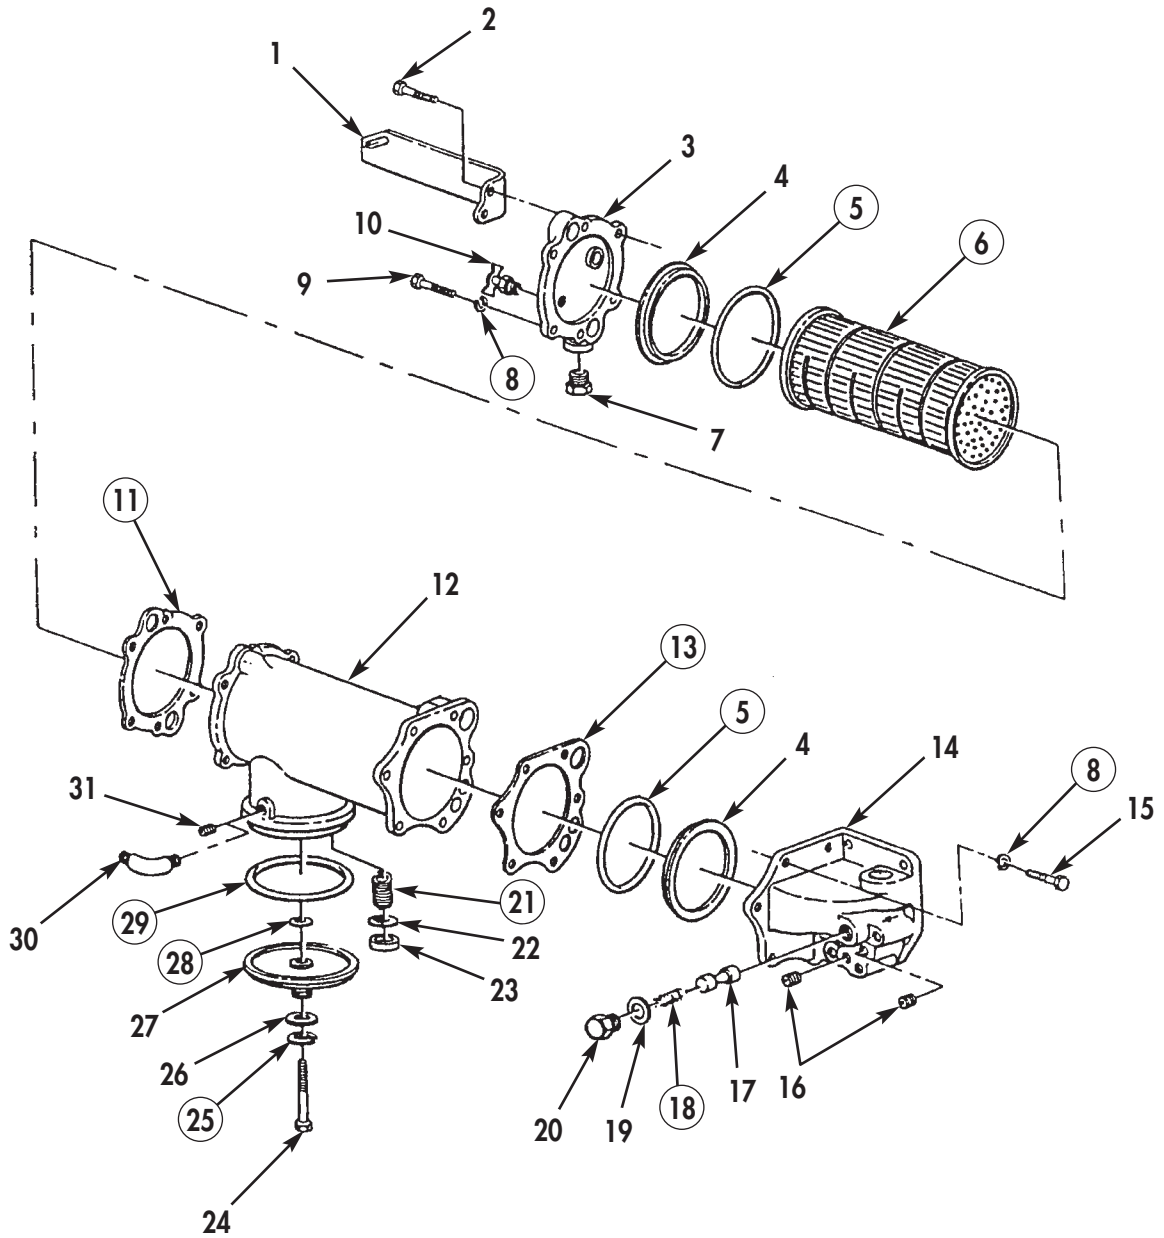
Oil Cooler Assembly—Big Cam I Engine.
